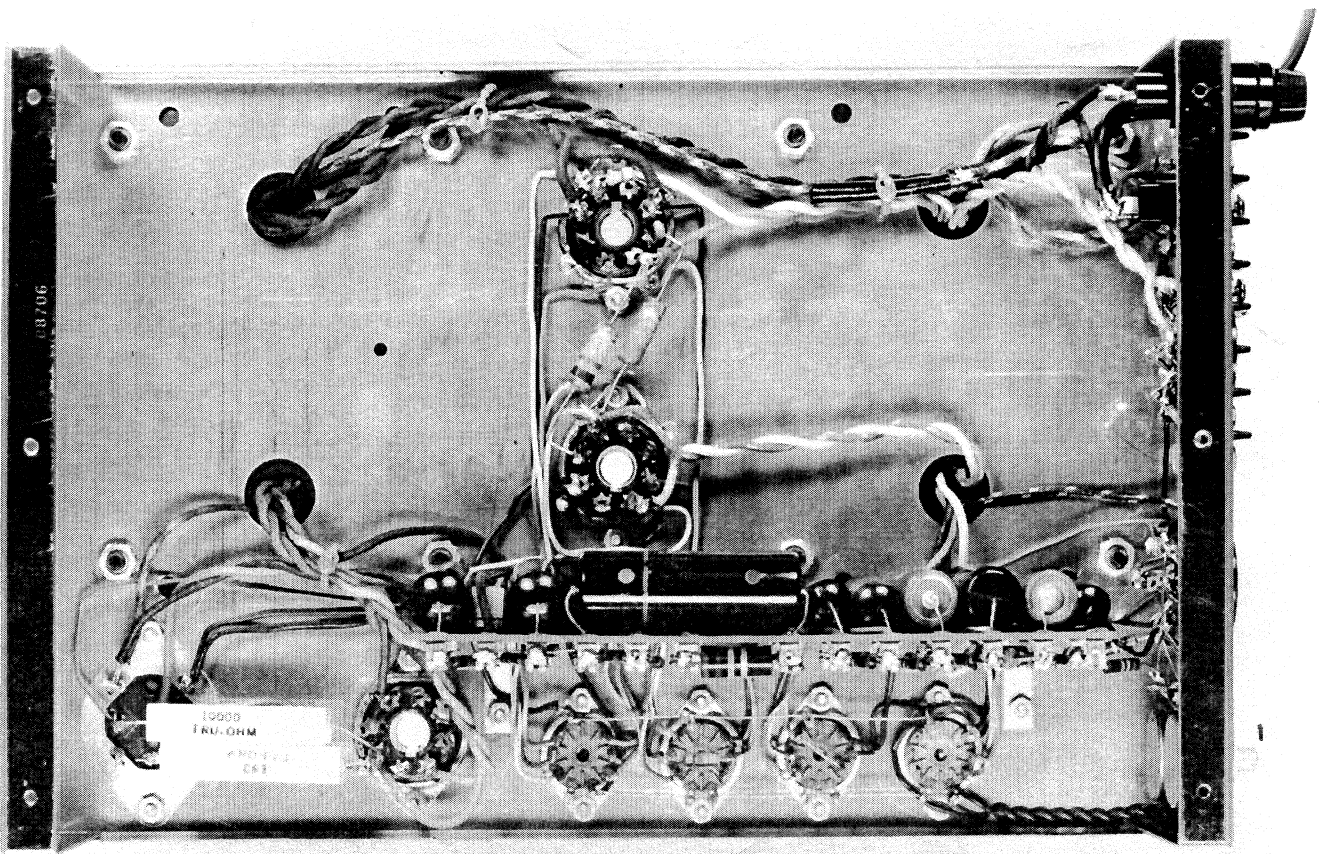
THE COMPLETED AMPLIFIER, READY FOR THE BOTTOM PLATE AND THE TUBES. CHECK THE STEPS IN STAGE 6 WITH THIS PHOTO
